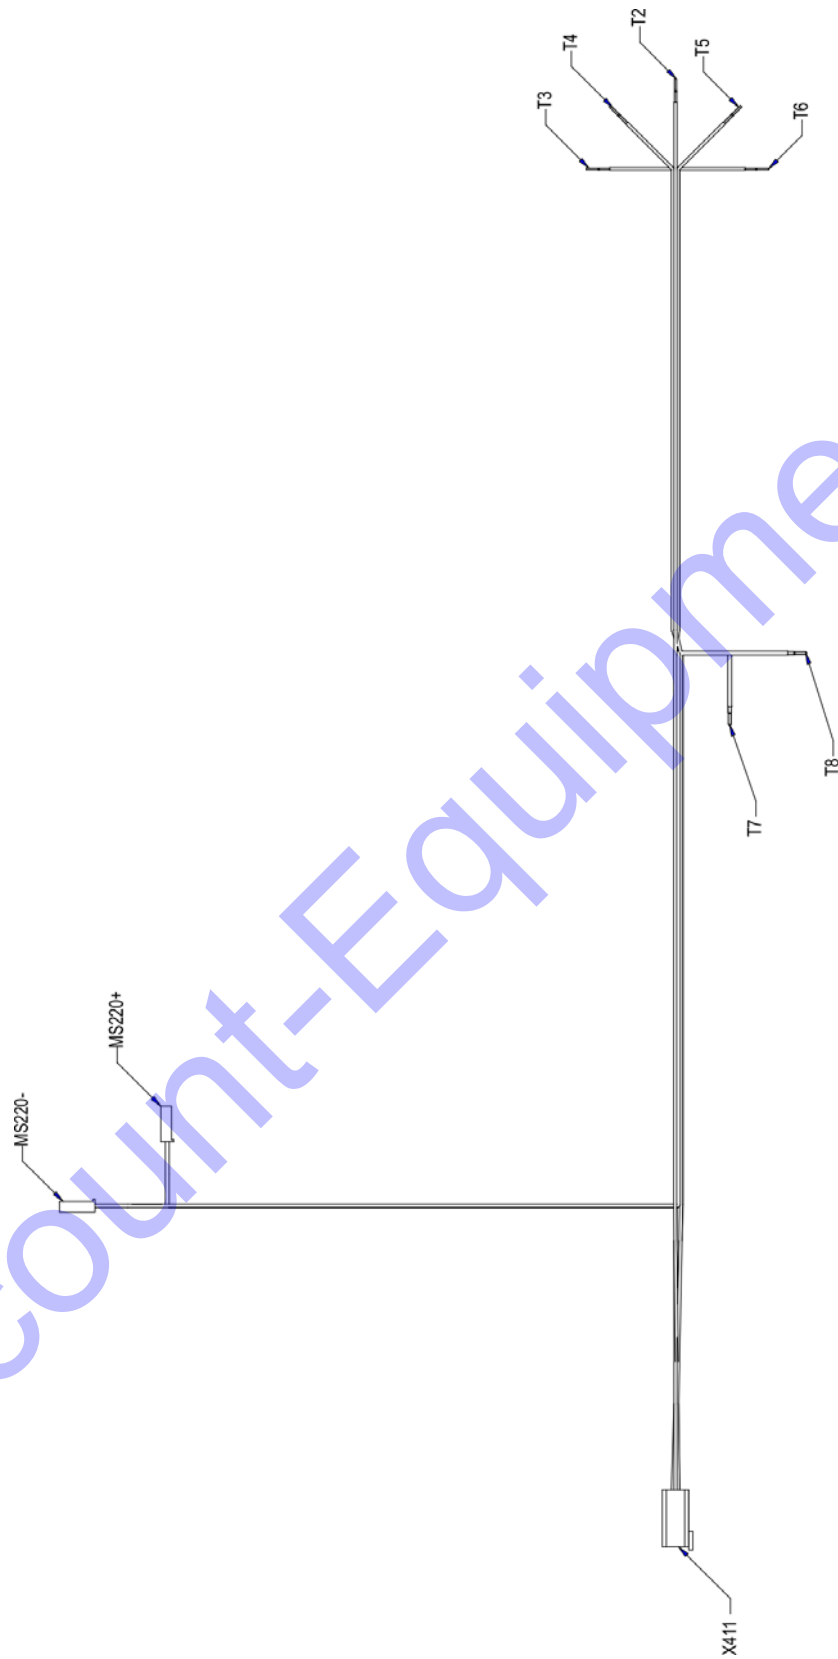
Platform to Boom Harness - Sheet 1 of 2
